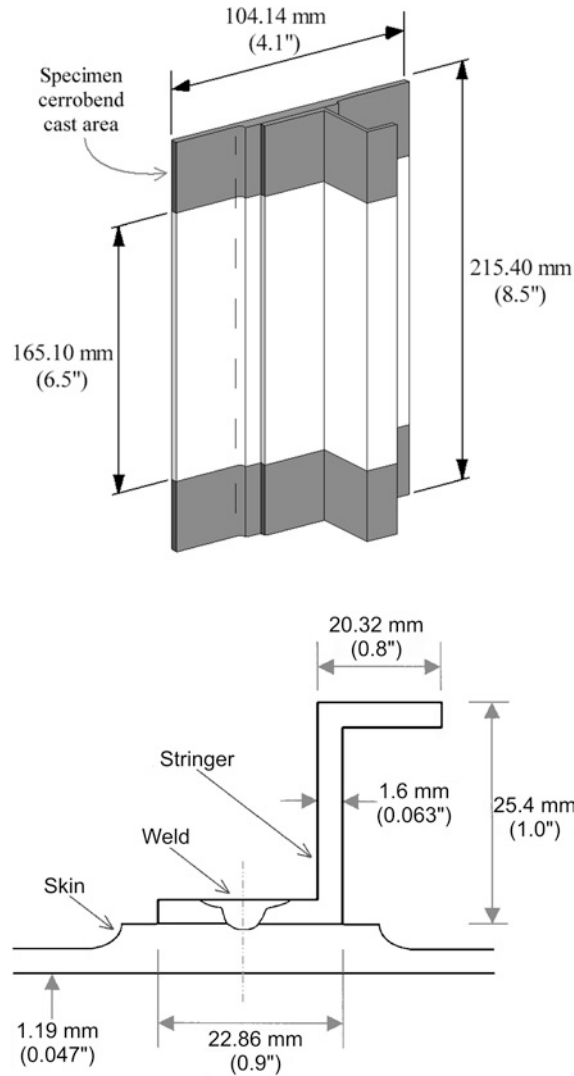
Specimen geometry. The figure outlines the geometric details of the friction stir welded validation crippling specimens.
